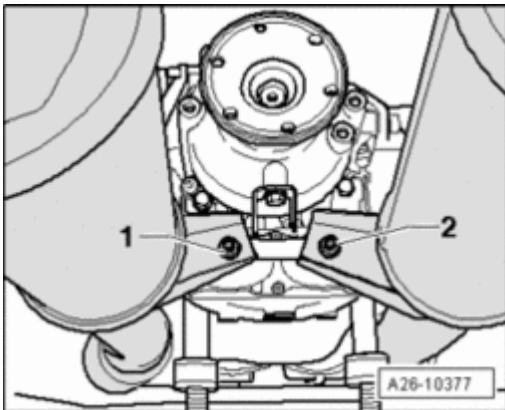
Removing Bolt On Bracket For Exhaust System And Catalytic Converter With Front Muffler
